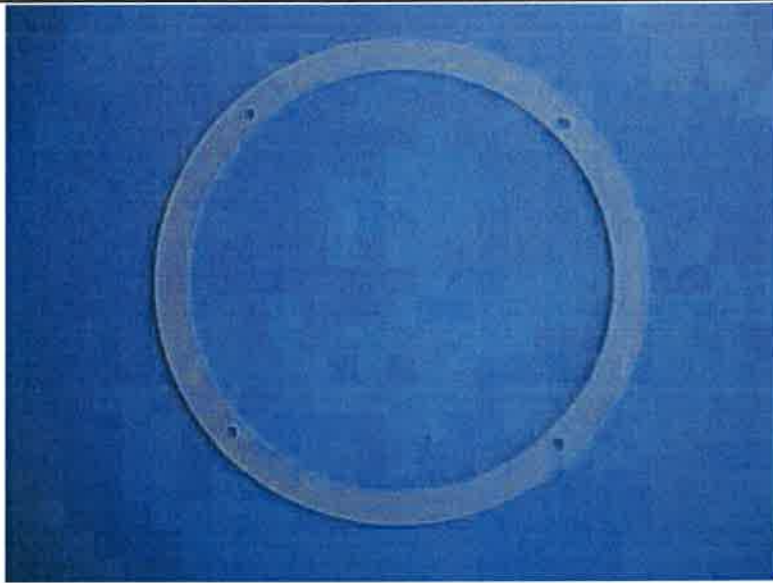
seal 00-419156-01 for skin space holder w/o Laser X-ray
